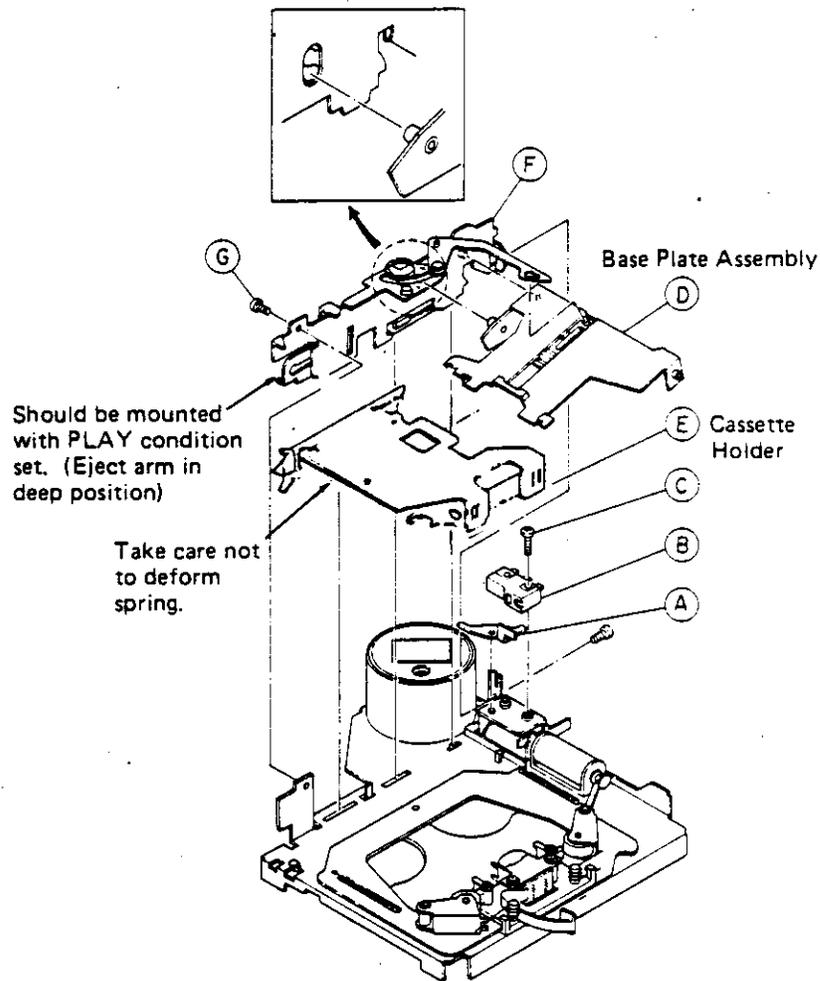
CASSETTE HOLDER & BASE PLATE
